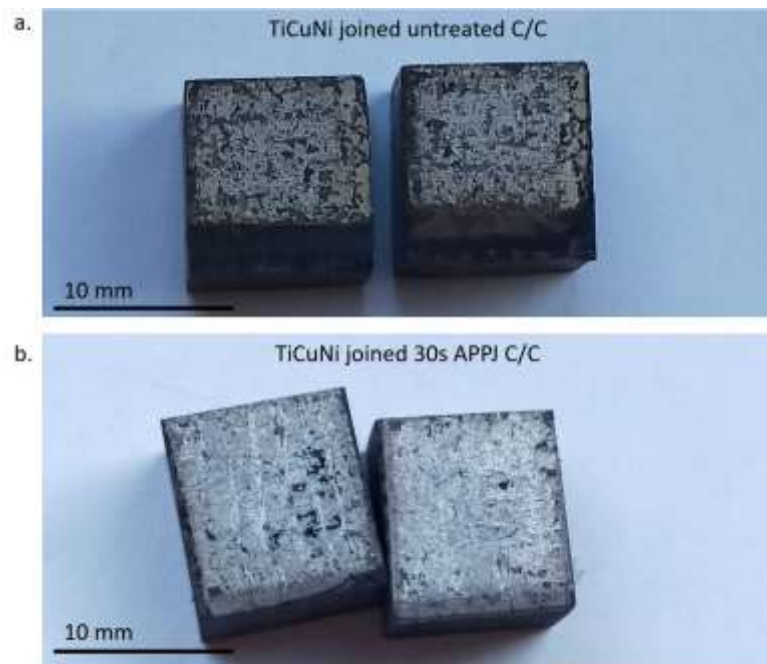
fracture surfaces of joined C/C samples: untreated (a) and APPJ-treated (b)
